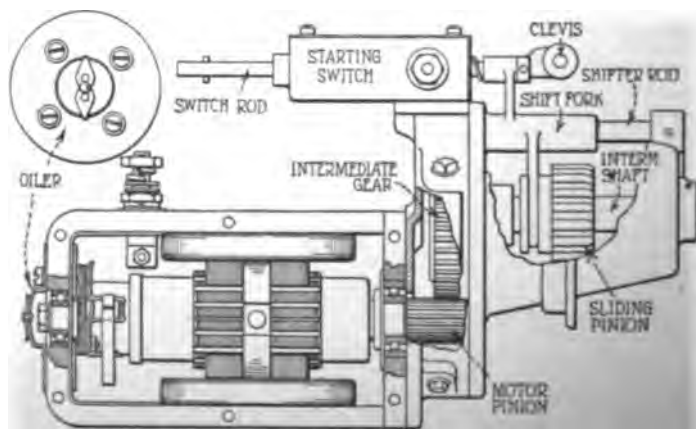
Sectional view of Gray & Davis starting motor, type Y
